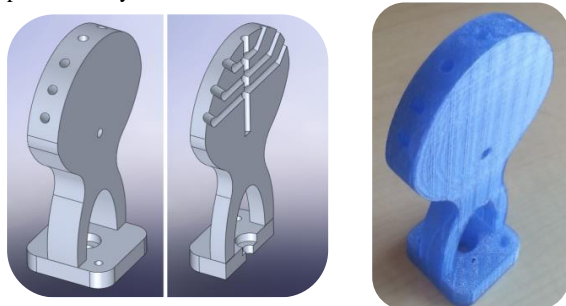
(a) Redesigned 3D CAD and (b) printed part for a new application.
